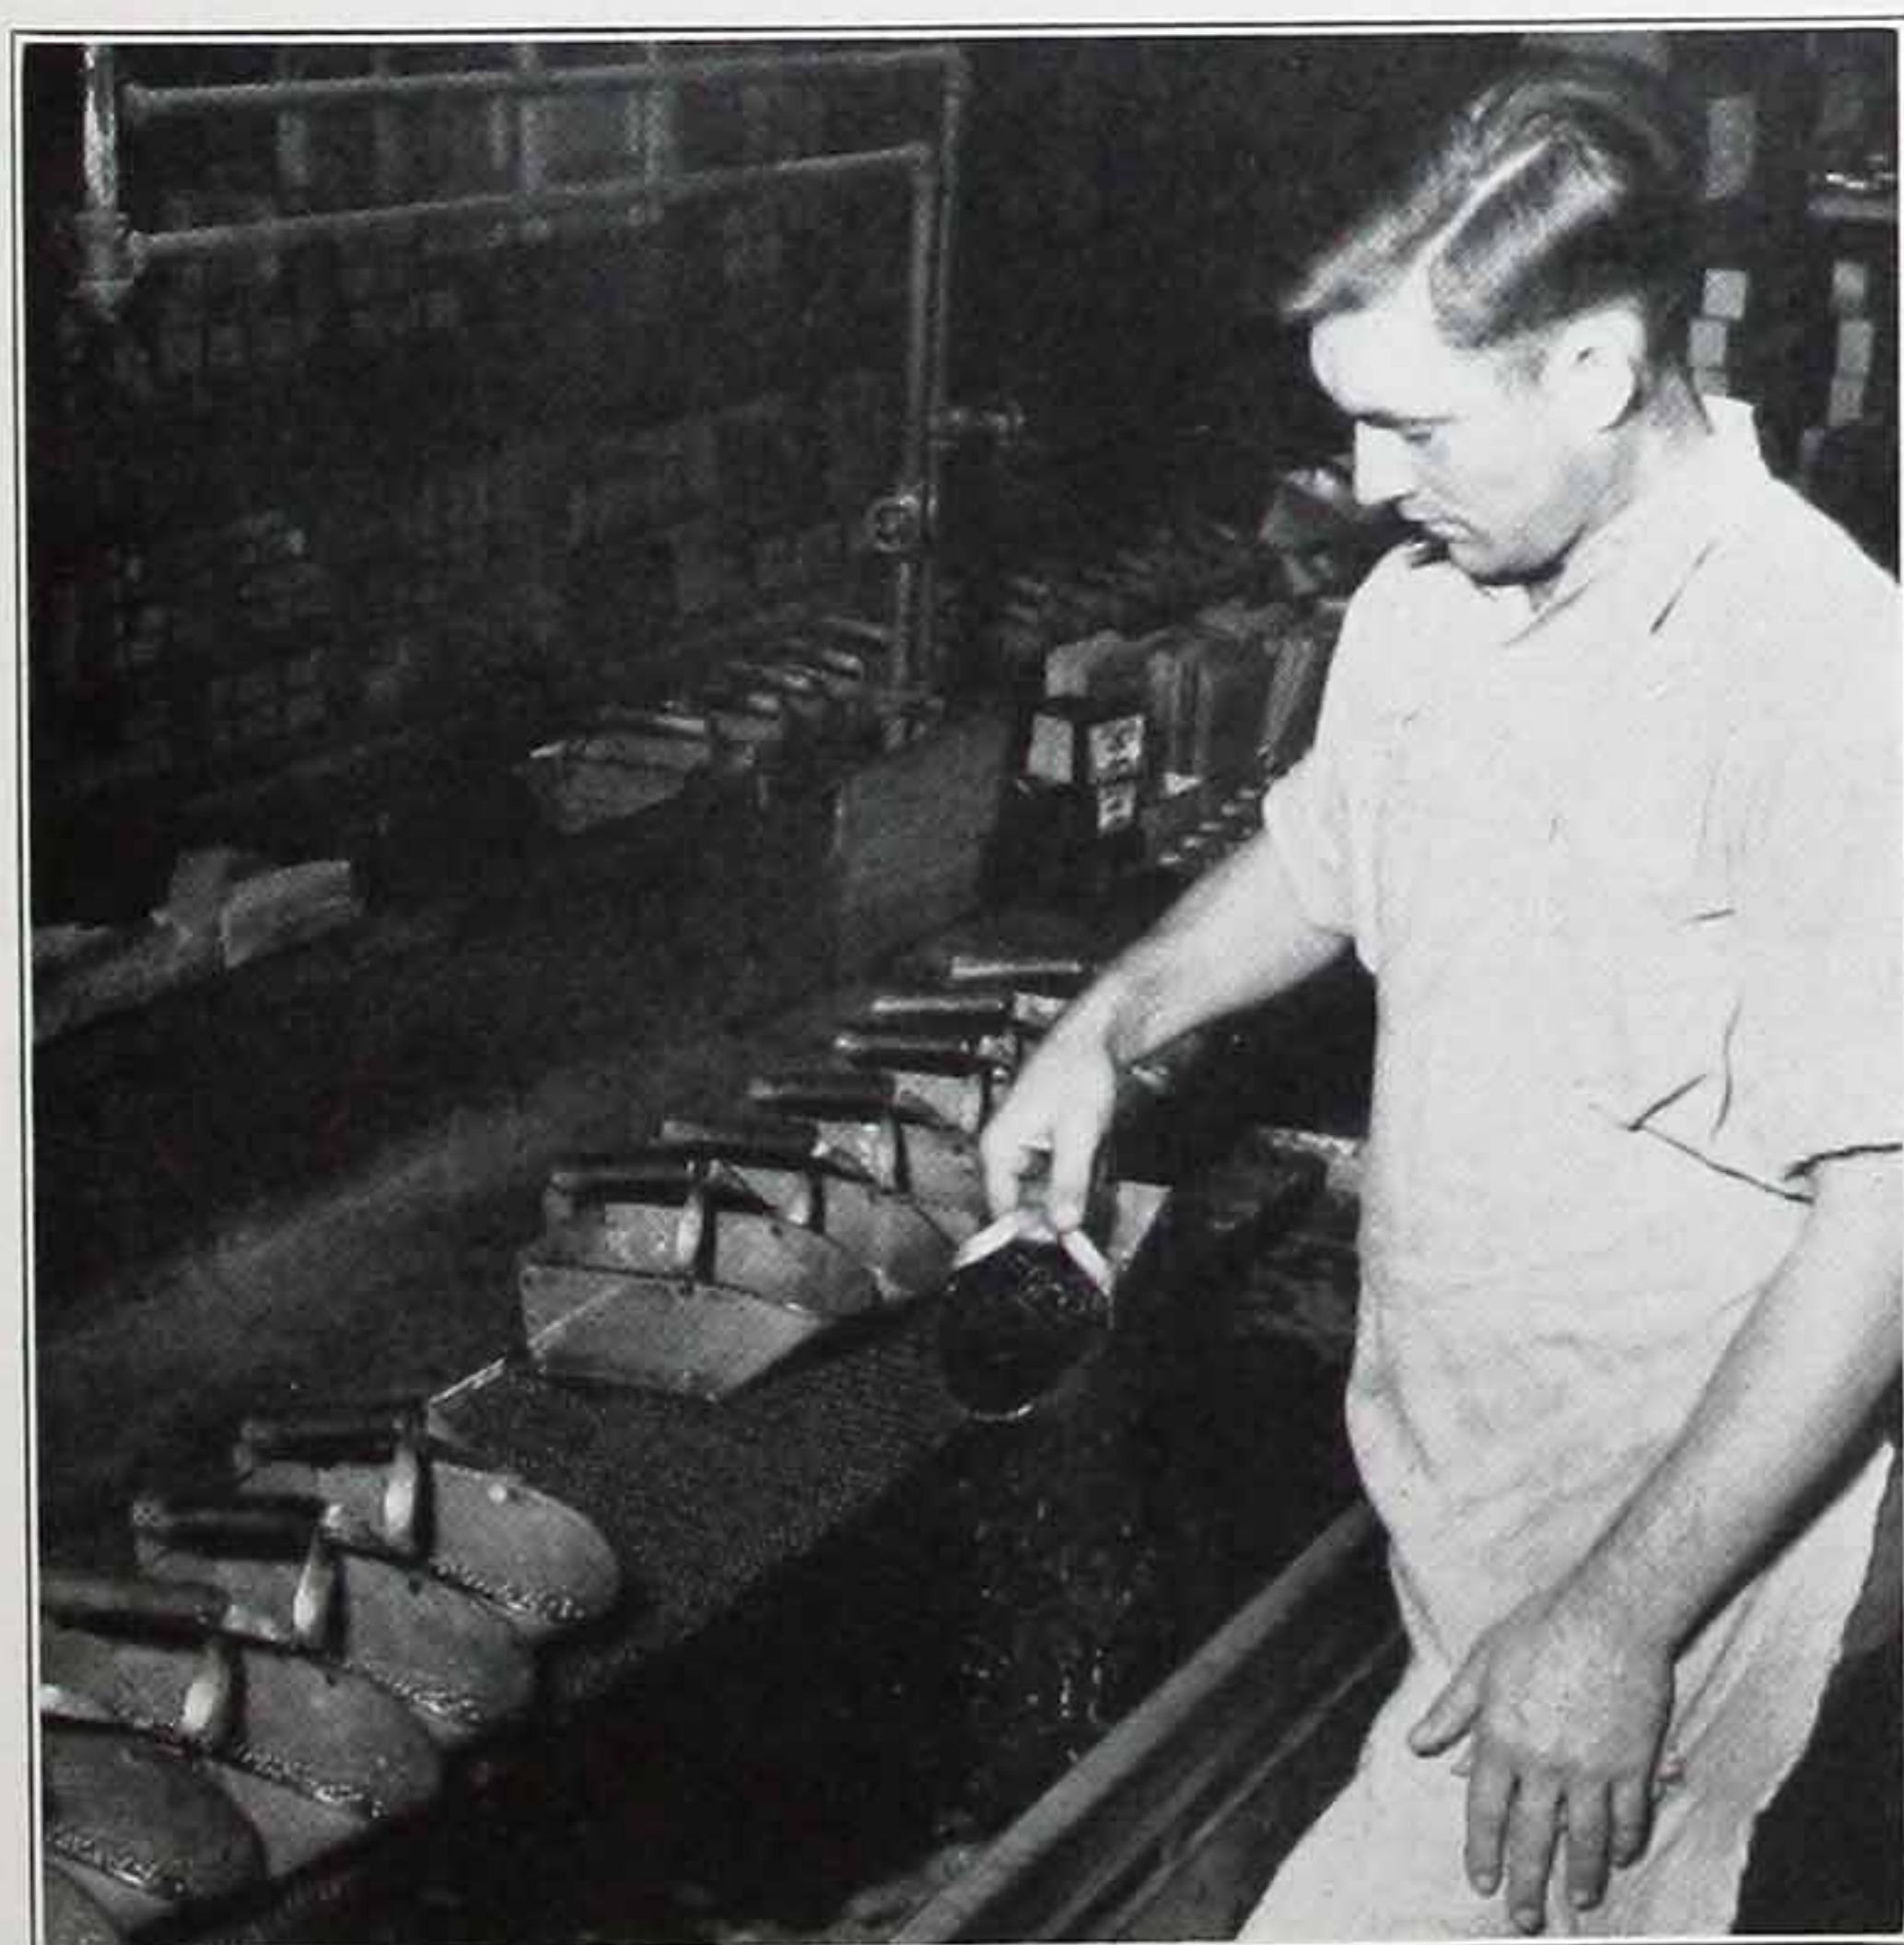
Stanorust application to ball bearings by dipping. The application is made with a minimum amount of equipment and handling, and does not leave an excess of rust preventive on the bearings.
